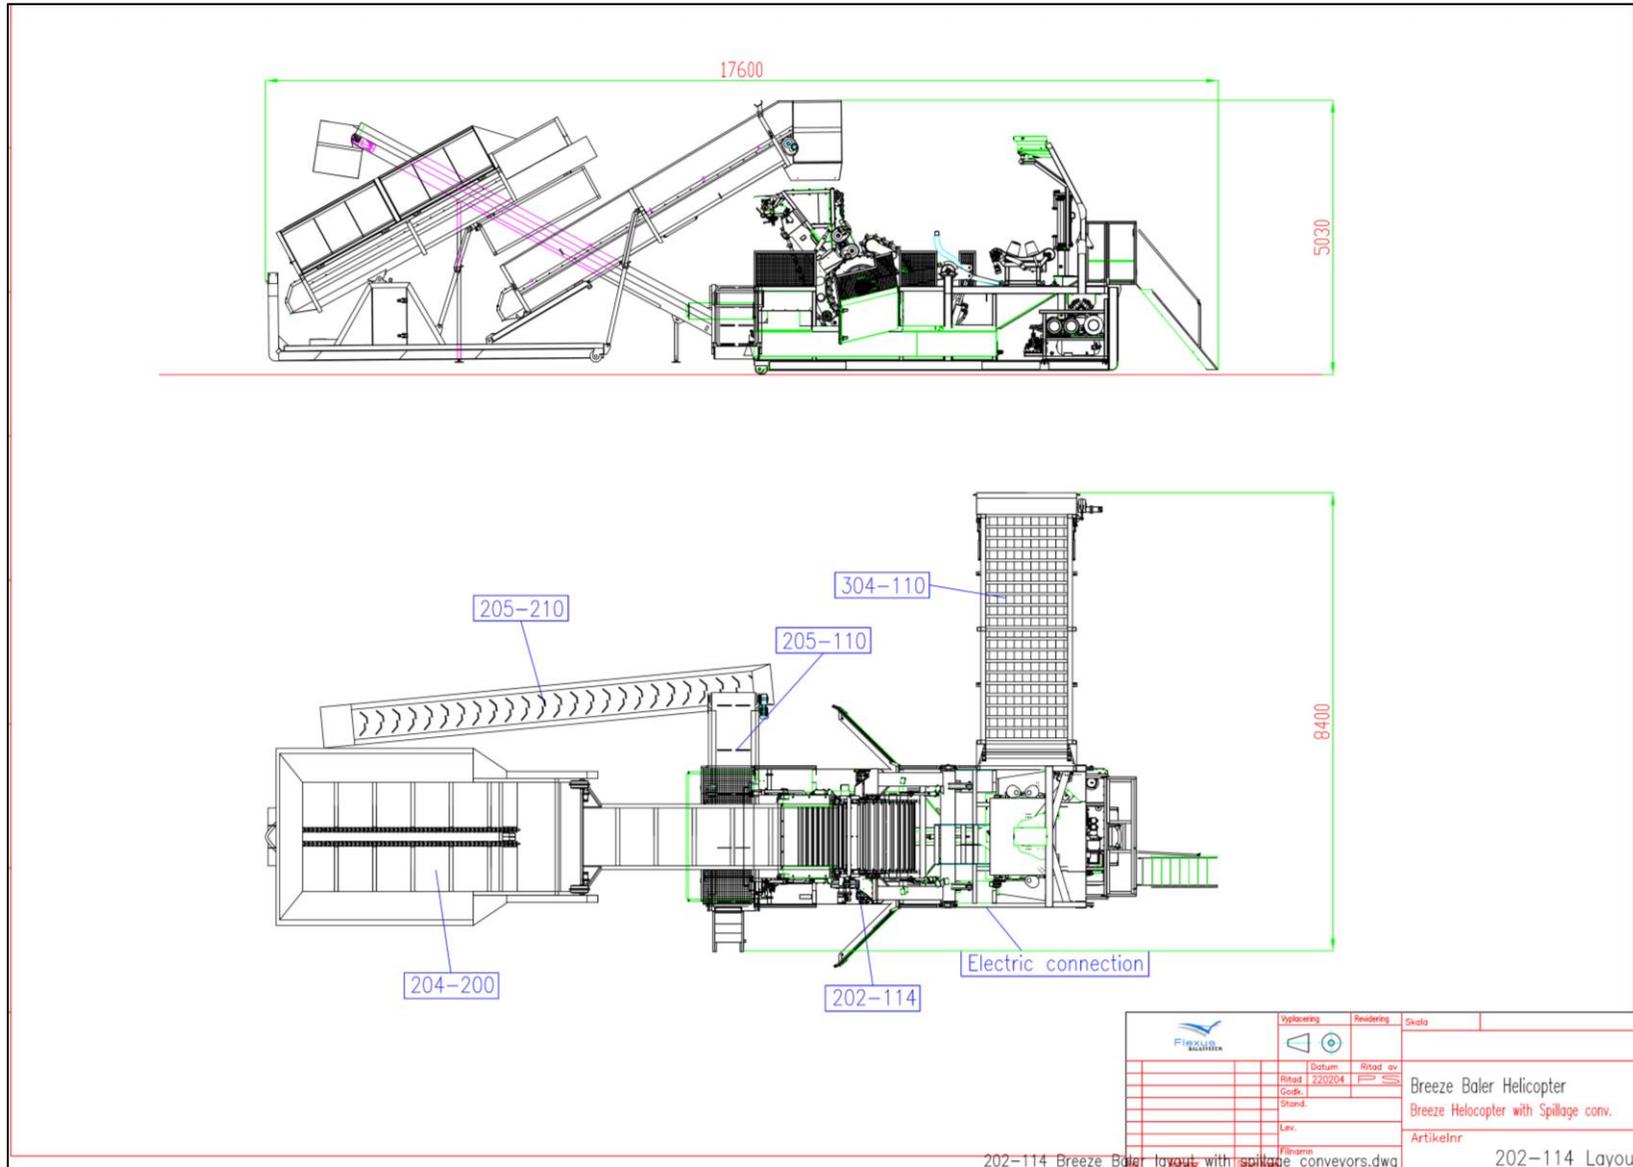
Plan and elevation drawing of the new breeze bailer plant to be installed at the former scrapyard
